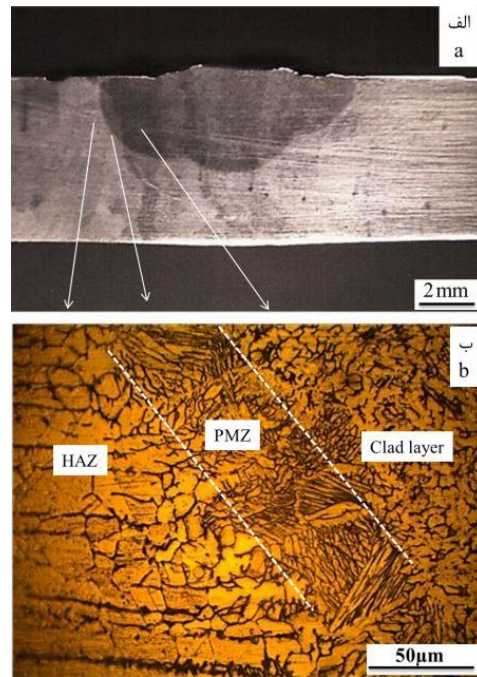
a) Macrostructure of welded sample 1 b) Microstructure of different of welding zone
